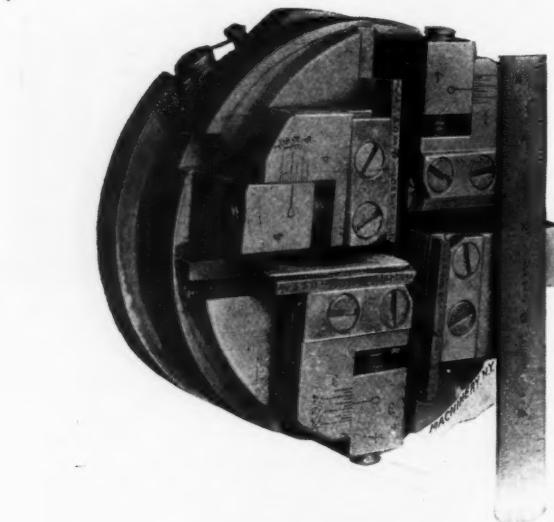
Landis Solid Adjustable Die-head for Automatic Screw Machines, etc.
